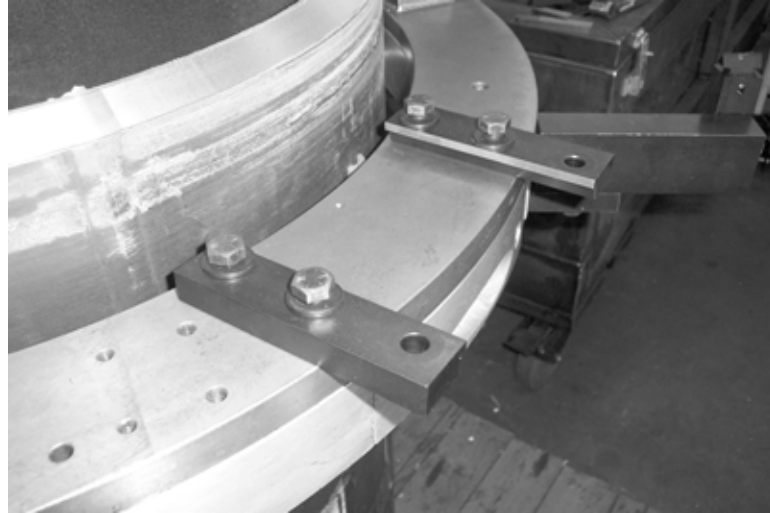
Install the slide mounting blocks on the rotating ring. Leave the mounting bolts loose. (If there is more distance between the LCSF and the pipe, move the blocks to the forward position.)
